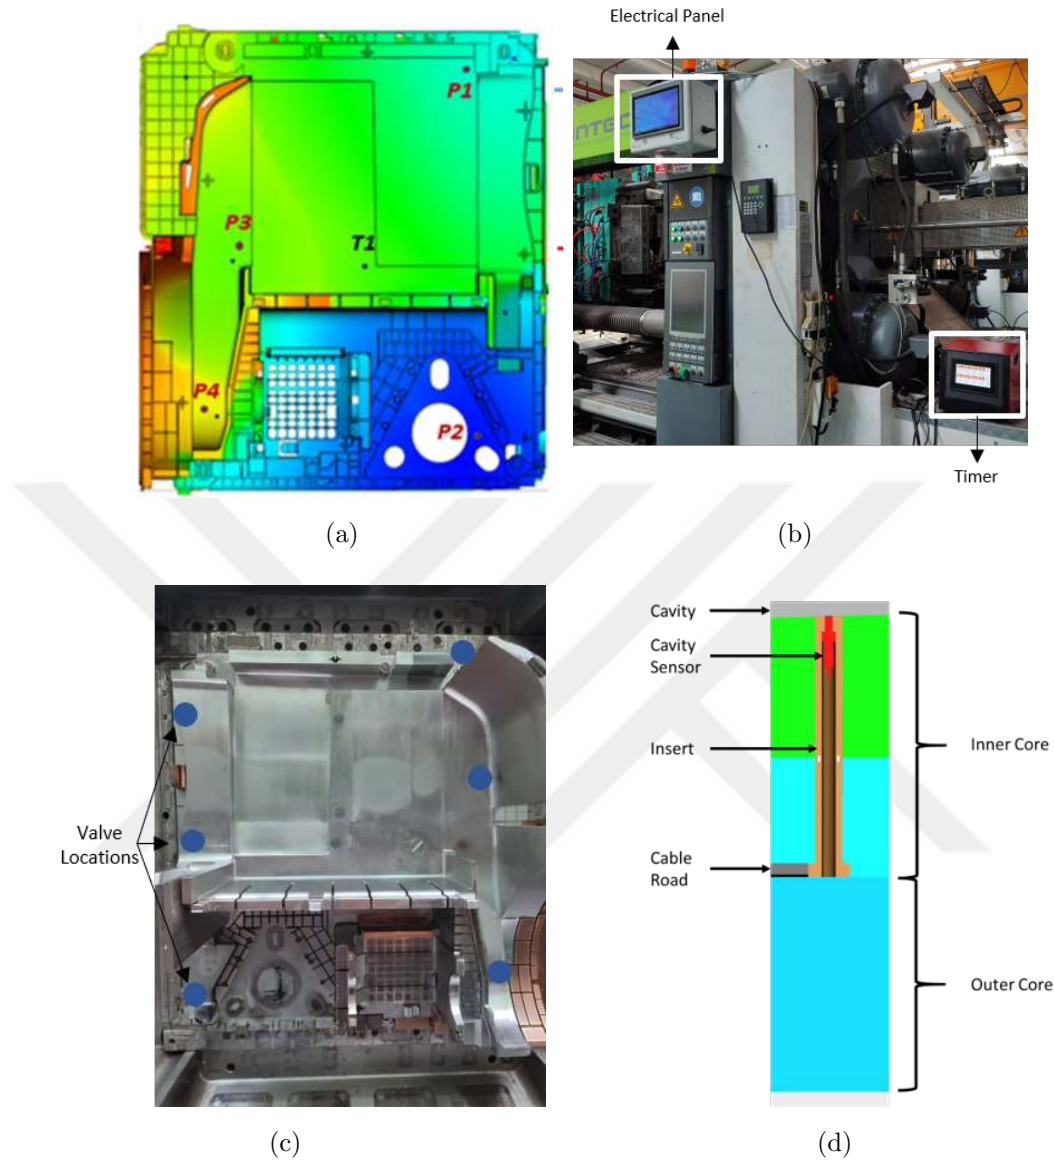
(a) Bottom chassis part of dryer with CS locations, (b) 1500-ton Wintec IMM, (c) mold of the bottom chassis part with valve locations, and (d) design details and implementation of the insert.
